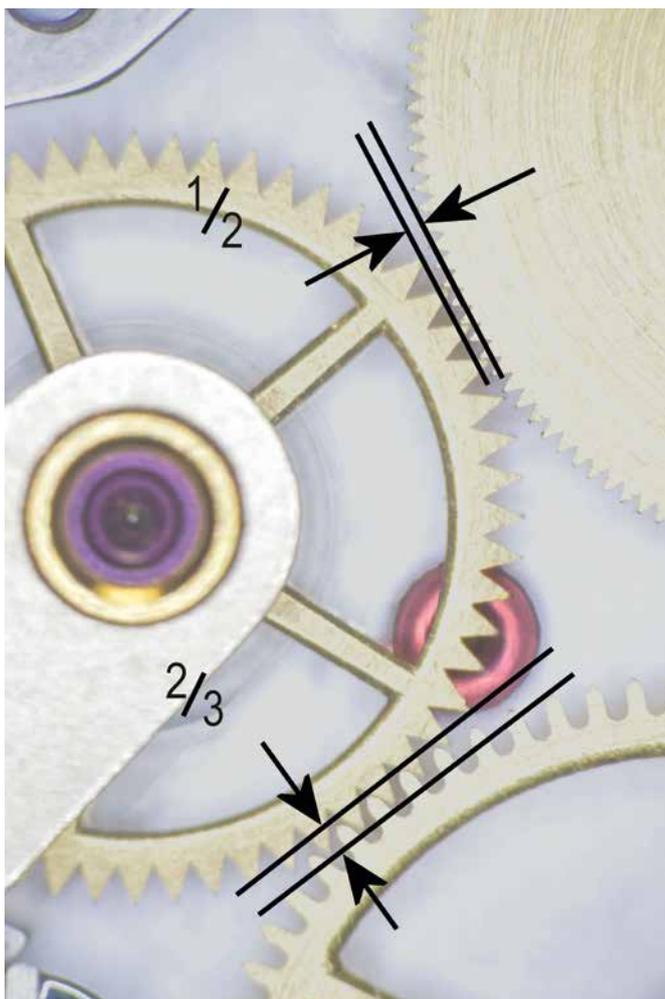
Adjusting depth of engagement of chronograph runner and driving wheel.
